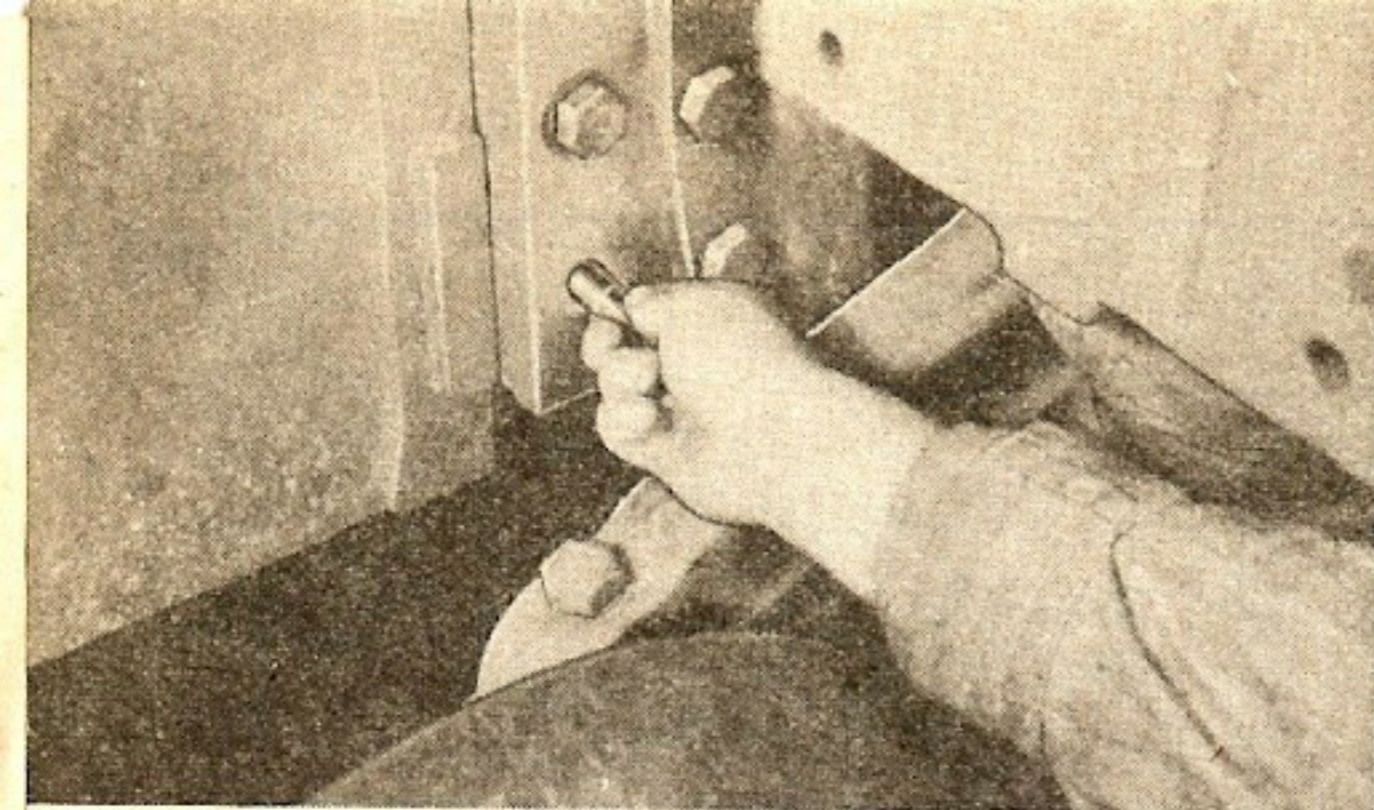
Install one of the smaller cigars in the bottom bolt hole on each side of the final drive housing. These two cigars, one on each side of the housing, will act as hinges so that the final drive can be lowered just enough to install the eye (next step). O.K., take out the four bolts remaining in the housing. The rear winch cable now supports the unit.
